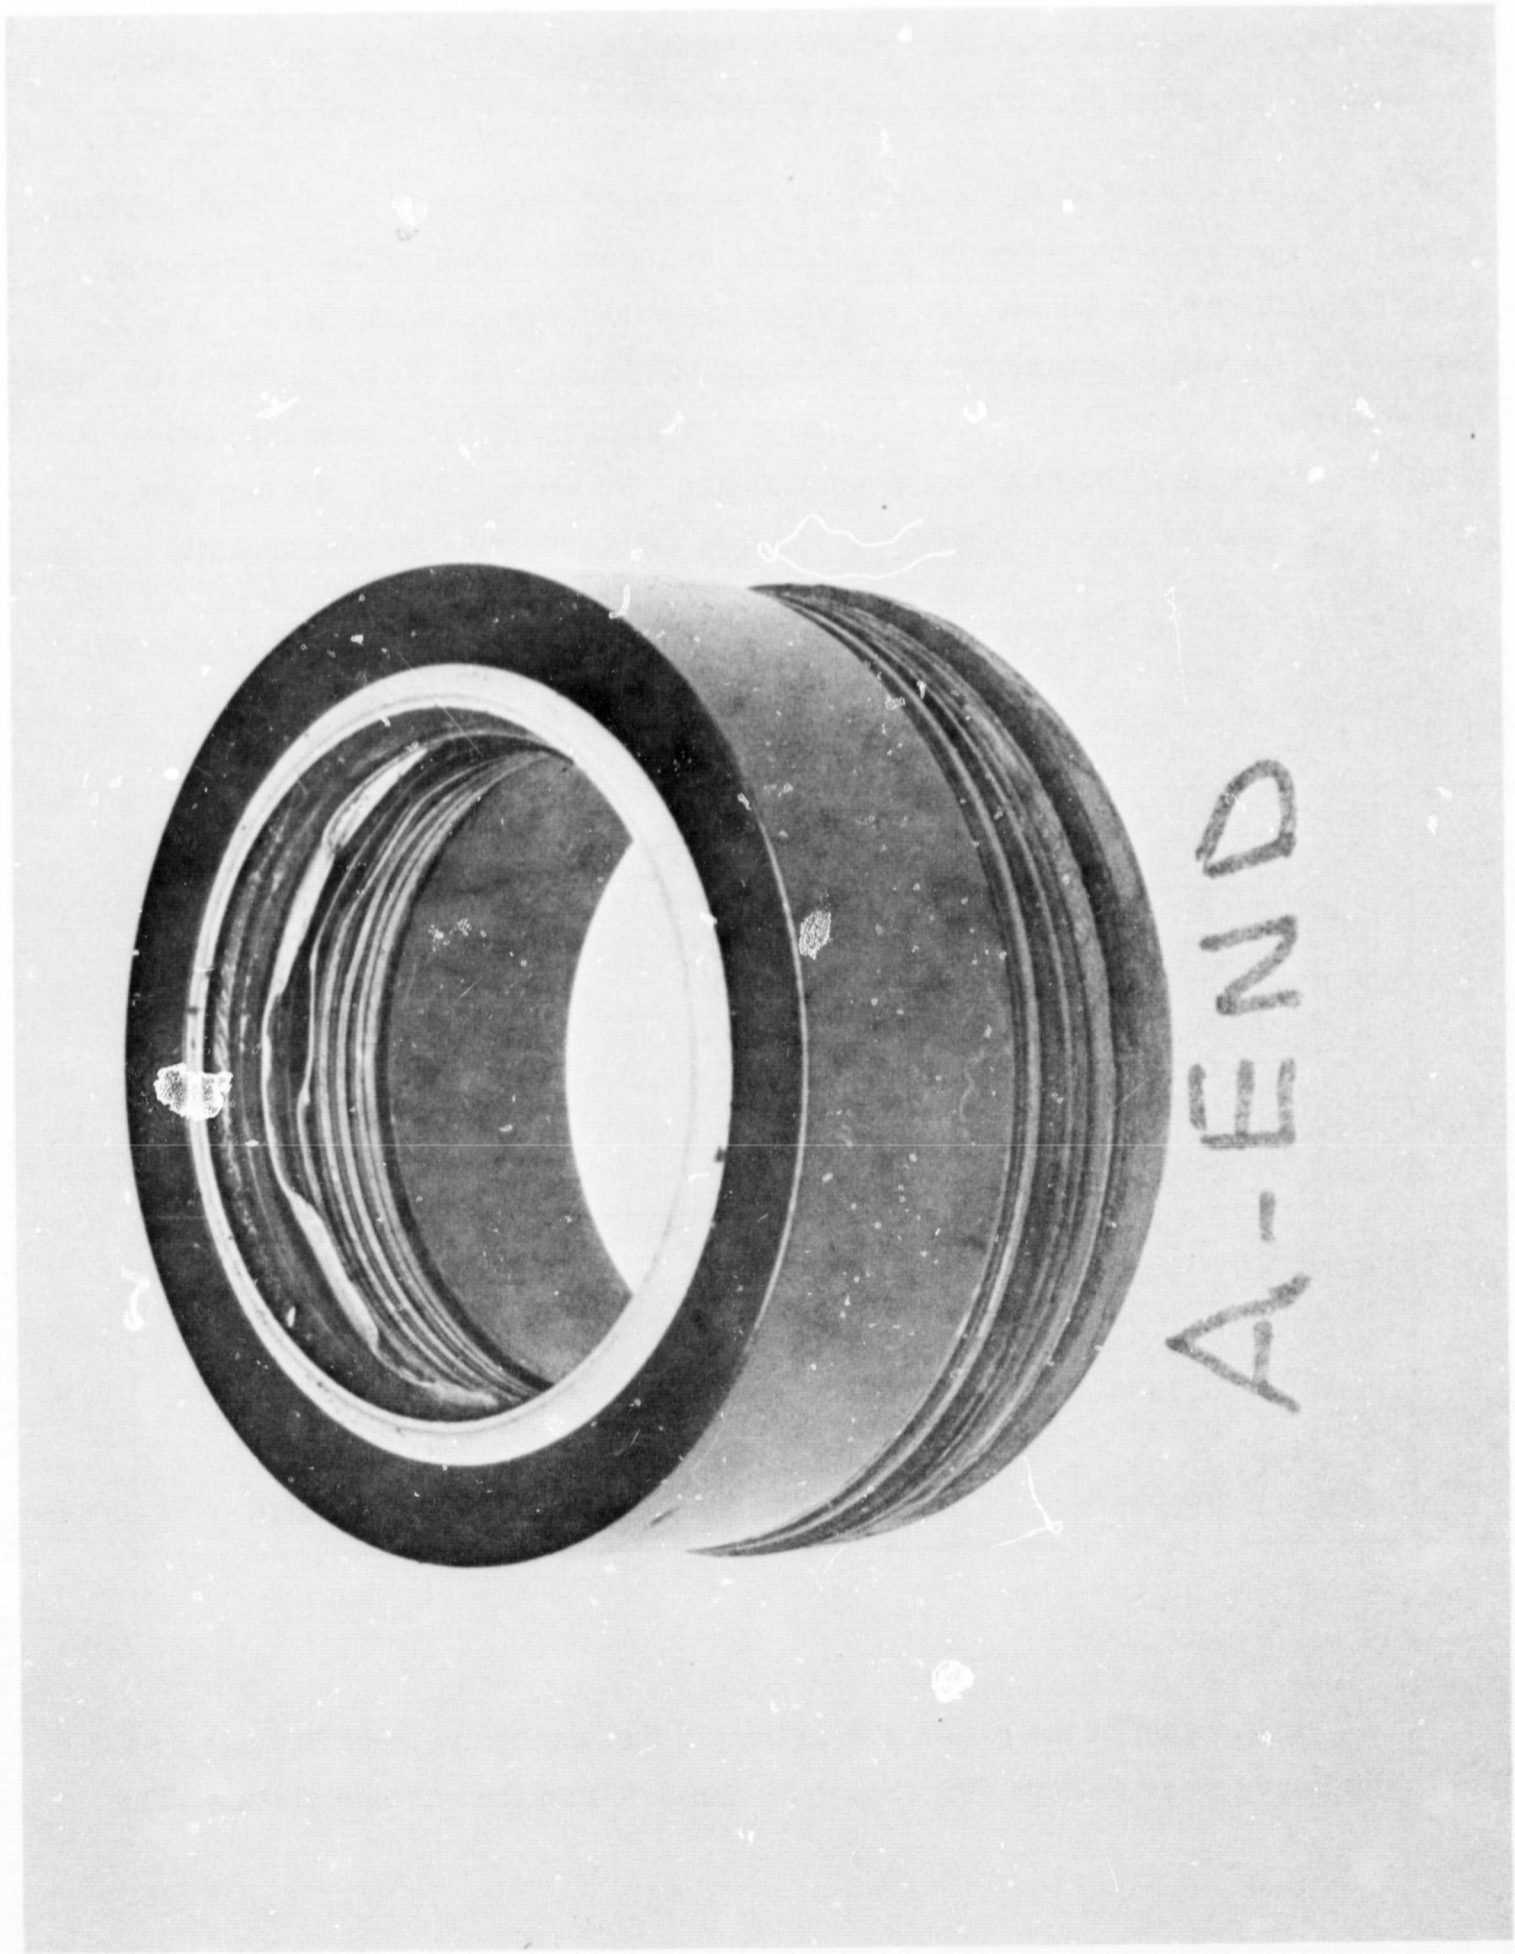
One-Inch Reed Seal, A-End (Damaged during disassembly)
